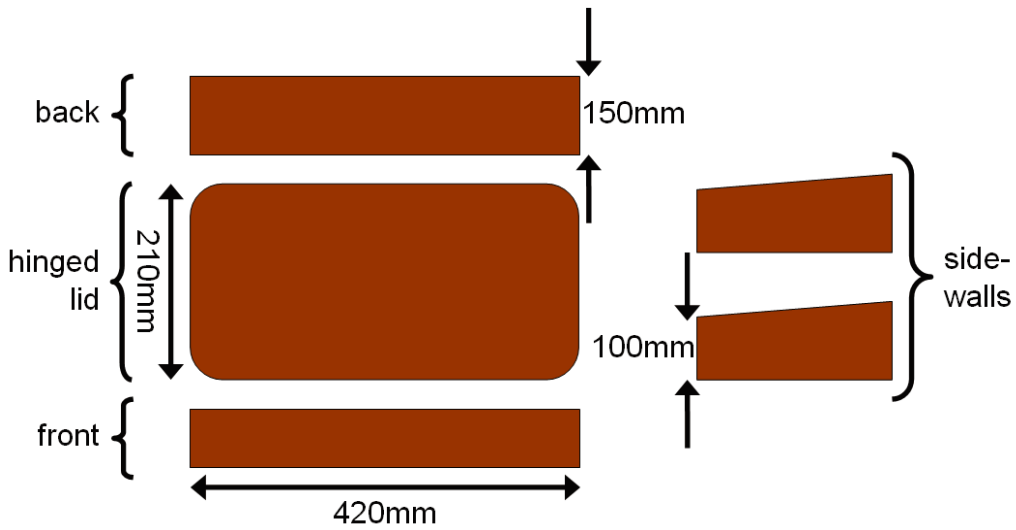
Dimensions for manufacturing the wooden prototype console.
